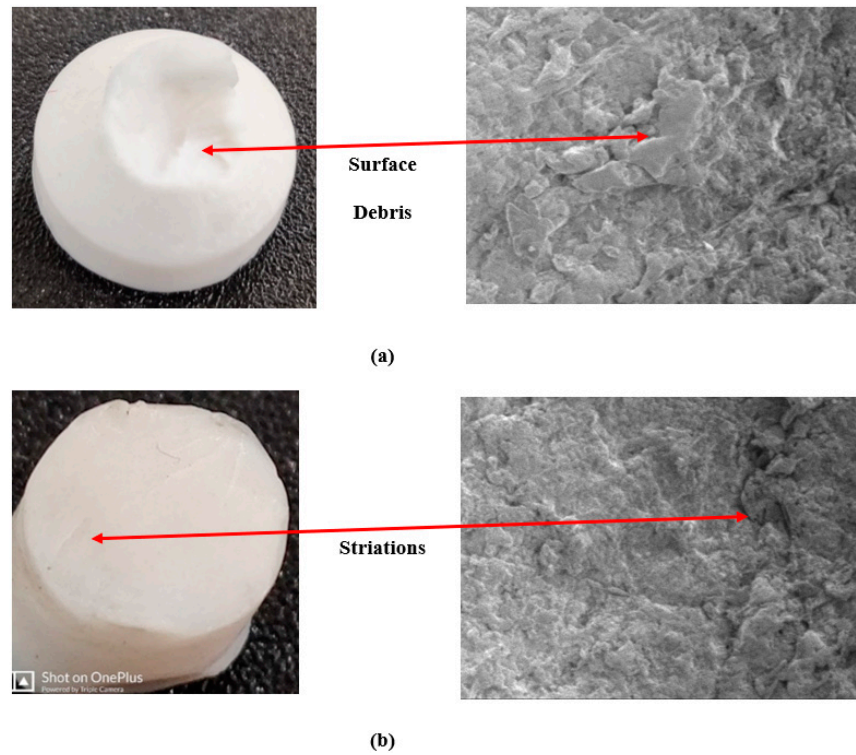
(a) Crescent shaped edge. (b) fractured surface for lower fretting depth.
